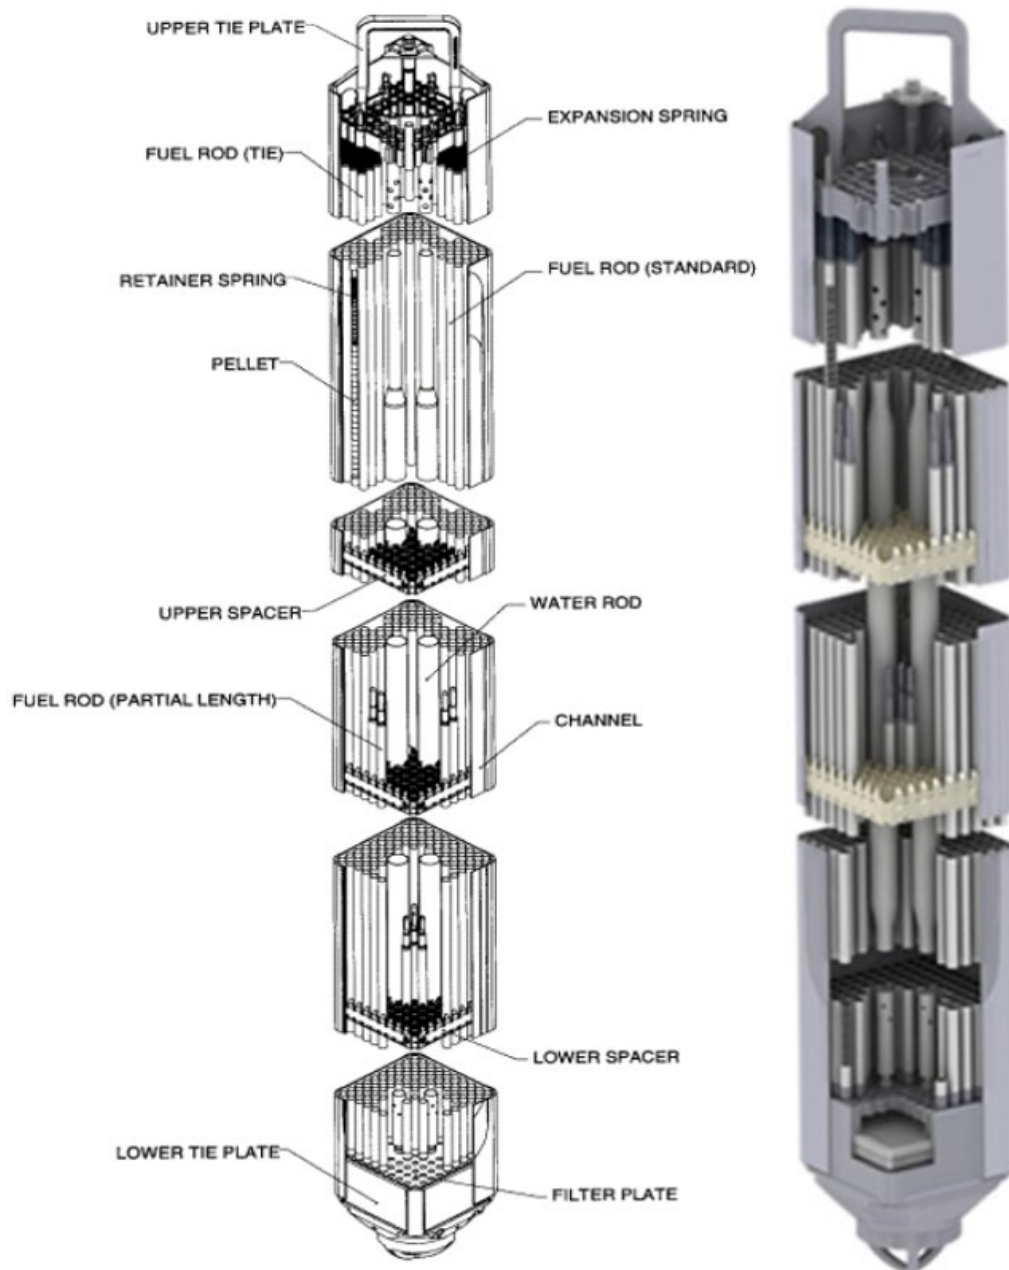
GNF2 Fuel Assembly and Channel
